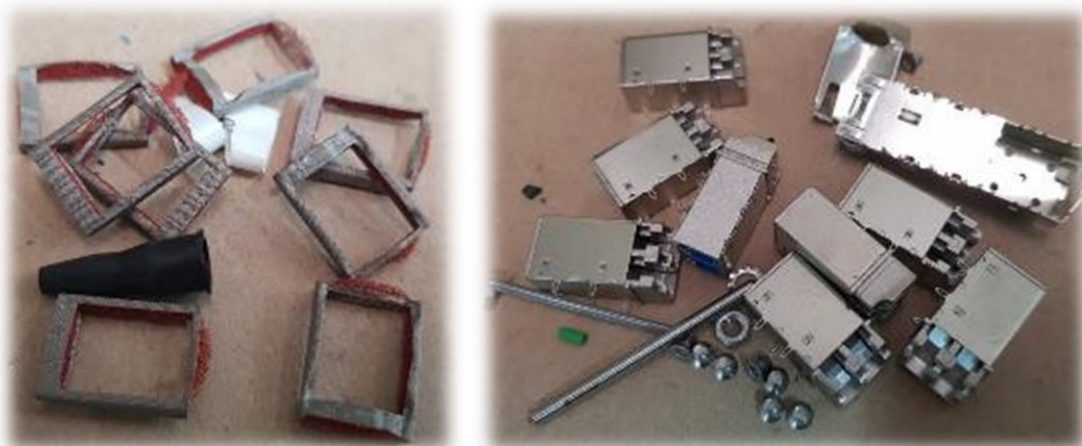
16ALM rubber (left) and metal (right) parts after disassembly.
